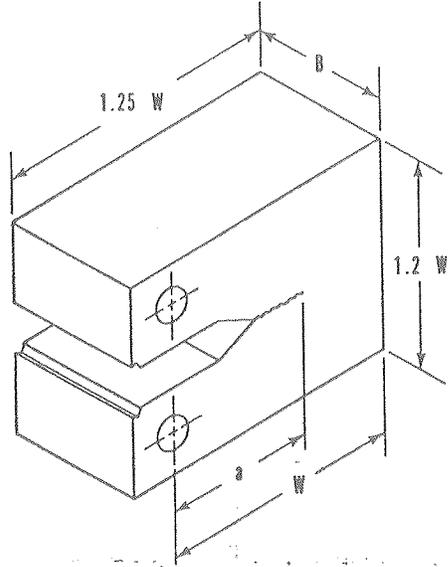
ASTM E399 compact specimen for fracture toughness testing [10]
